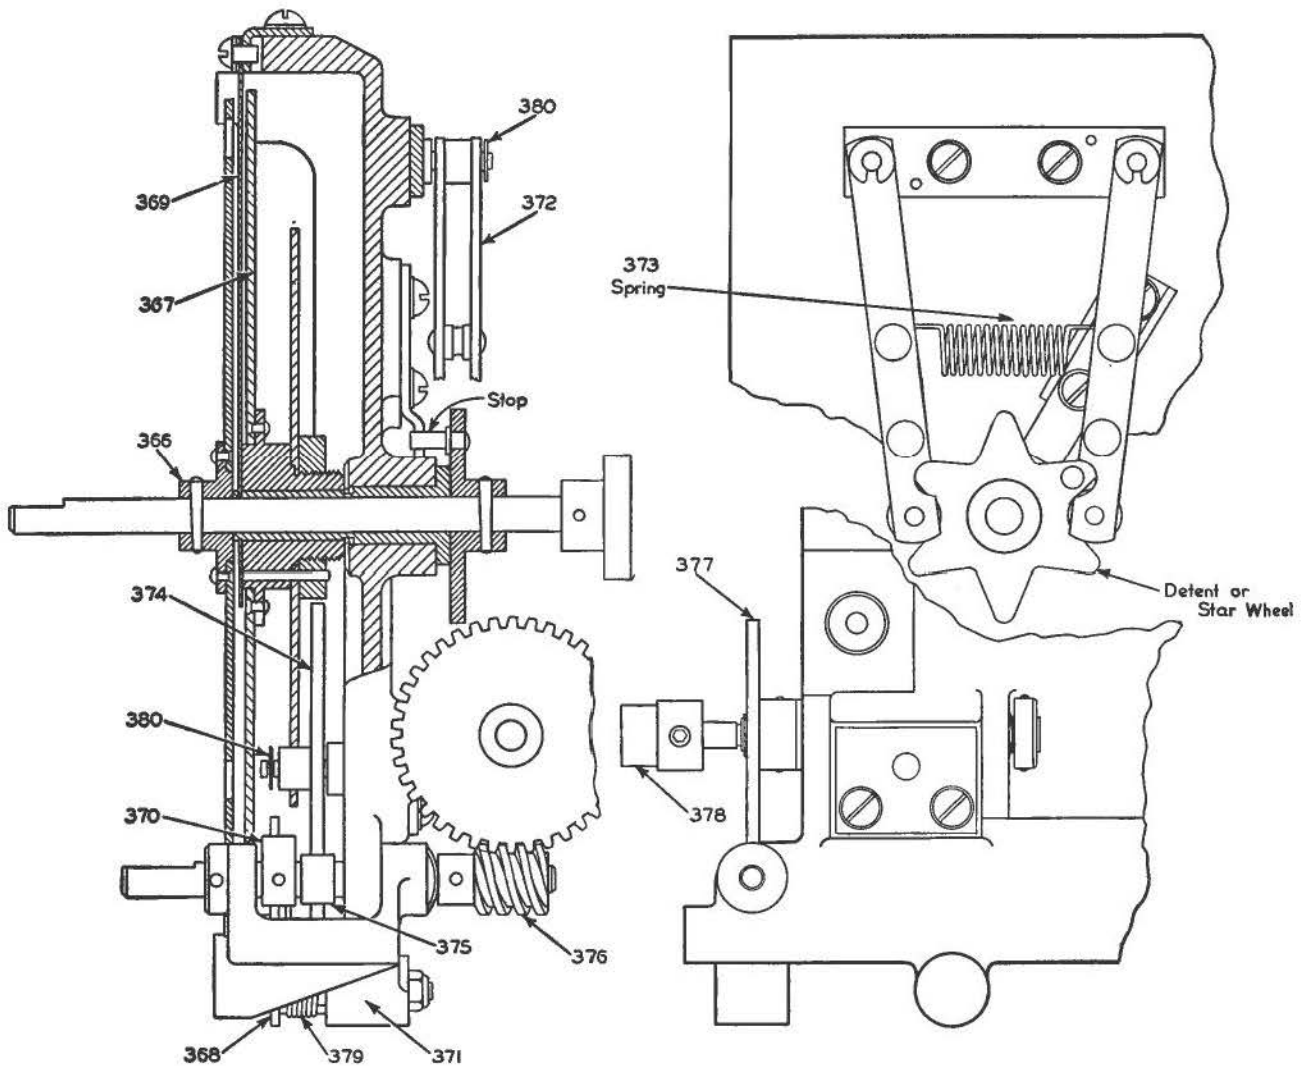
Radio Receiver BC-348-H Dial and Mask Assembly
